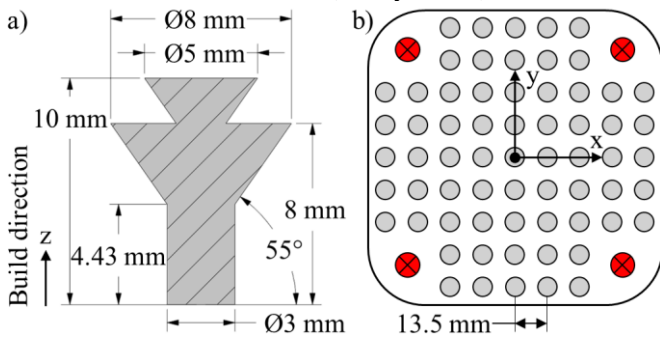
a) Pin specimen dimensions in sectional drawing. b) Arrangement pattern of 65 pins on the substrate plate.
